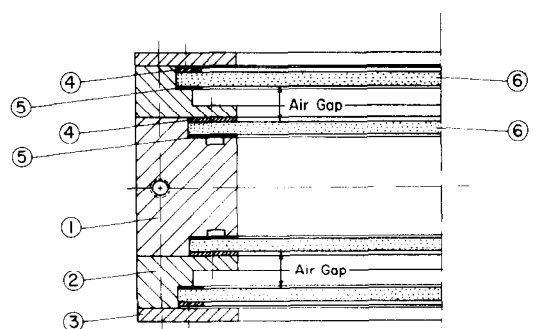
Cut-away top view of a test cell: (1) main U-frame, (2) collar, (3) clamping plate, (4) stress relief strip, (5) rubber gasket, (6) glass plate.
